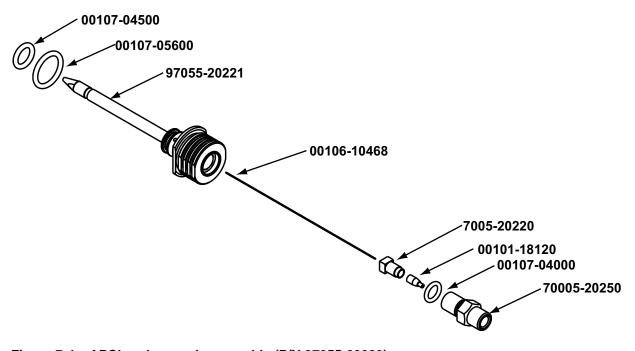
APCI probe nozzle assembly (P/N 97055-60089)
